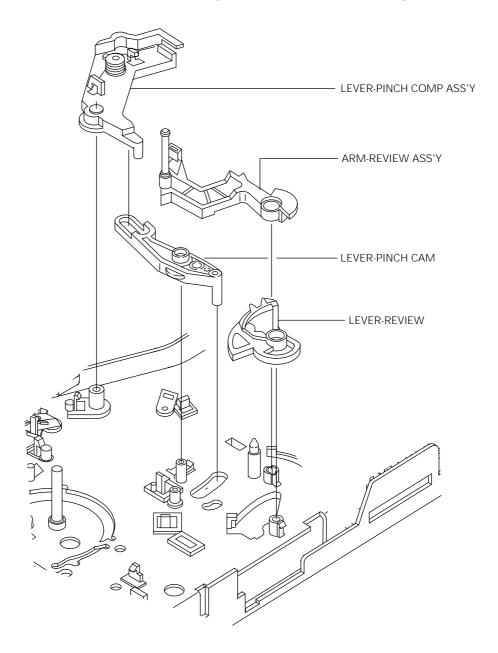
Exploded View of Lever Pinch Comp Ass'y, Lever Pinch Cam, Arm Review Ass'y and Lever Review Ass'y
